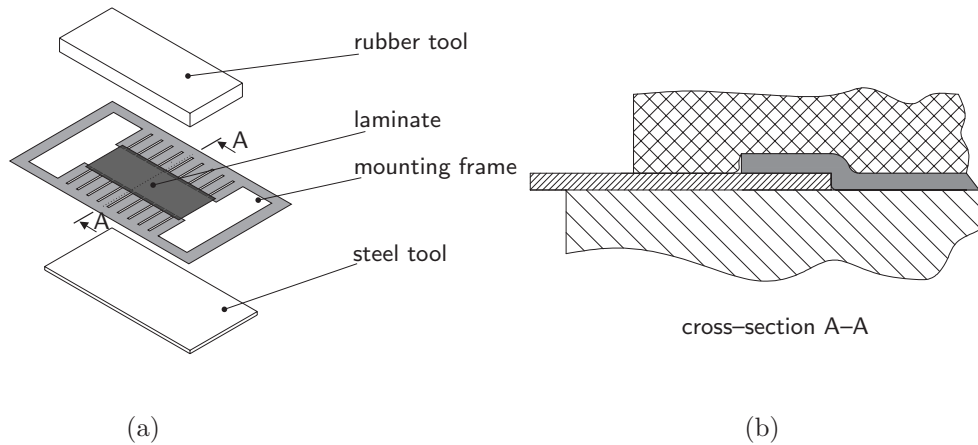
Rubber press configuration: (a) global set-up, and (b) cross-section of the laminate edge on the mounting frame in the closed press configuration
